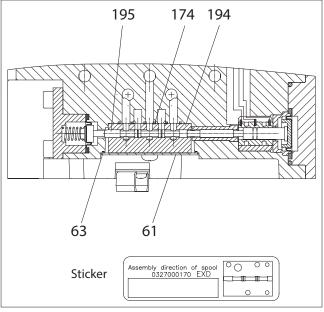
Spool valve assembly, ND9200, ND7200 and ND9300
